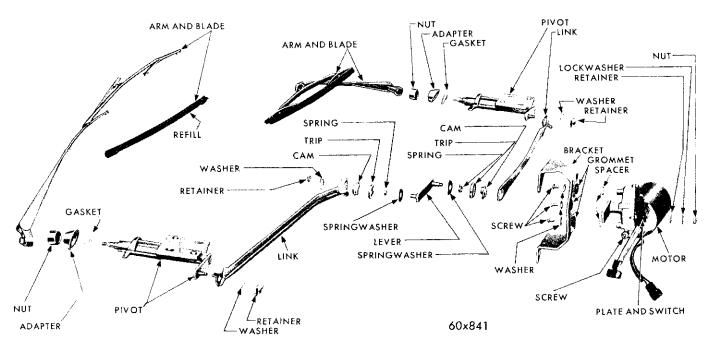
Windshield Wiper (Disassembled) (Imperial Only)
